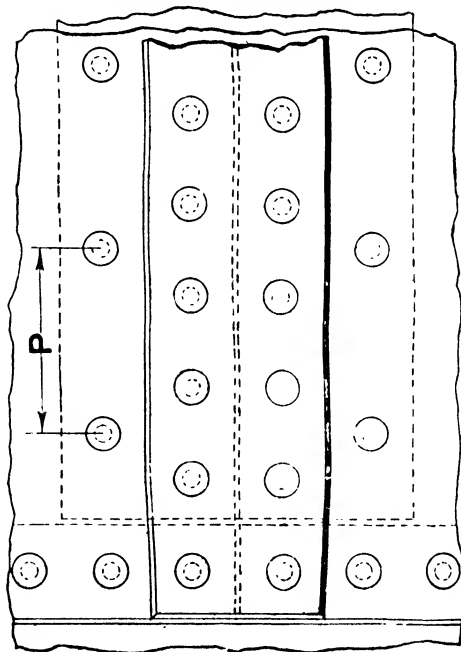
,726.—Example of butt and double strap joint, double riveted.
